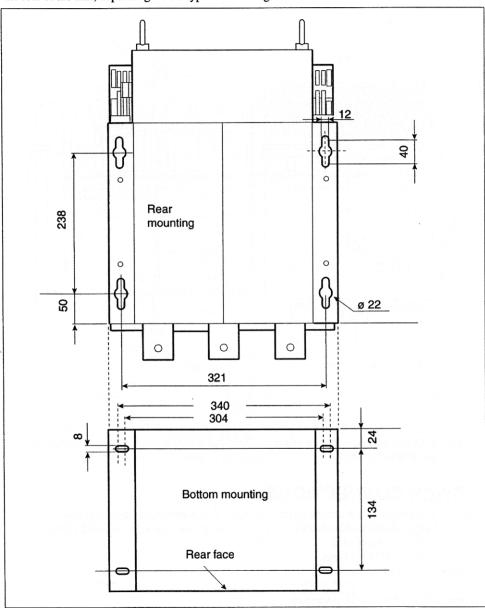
Mounting details (in mm) for the 700A and 1000A rated TC3001 units
